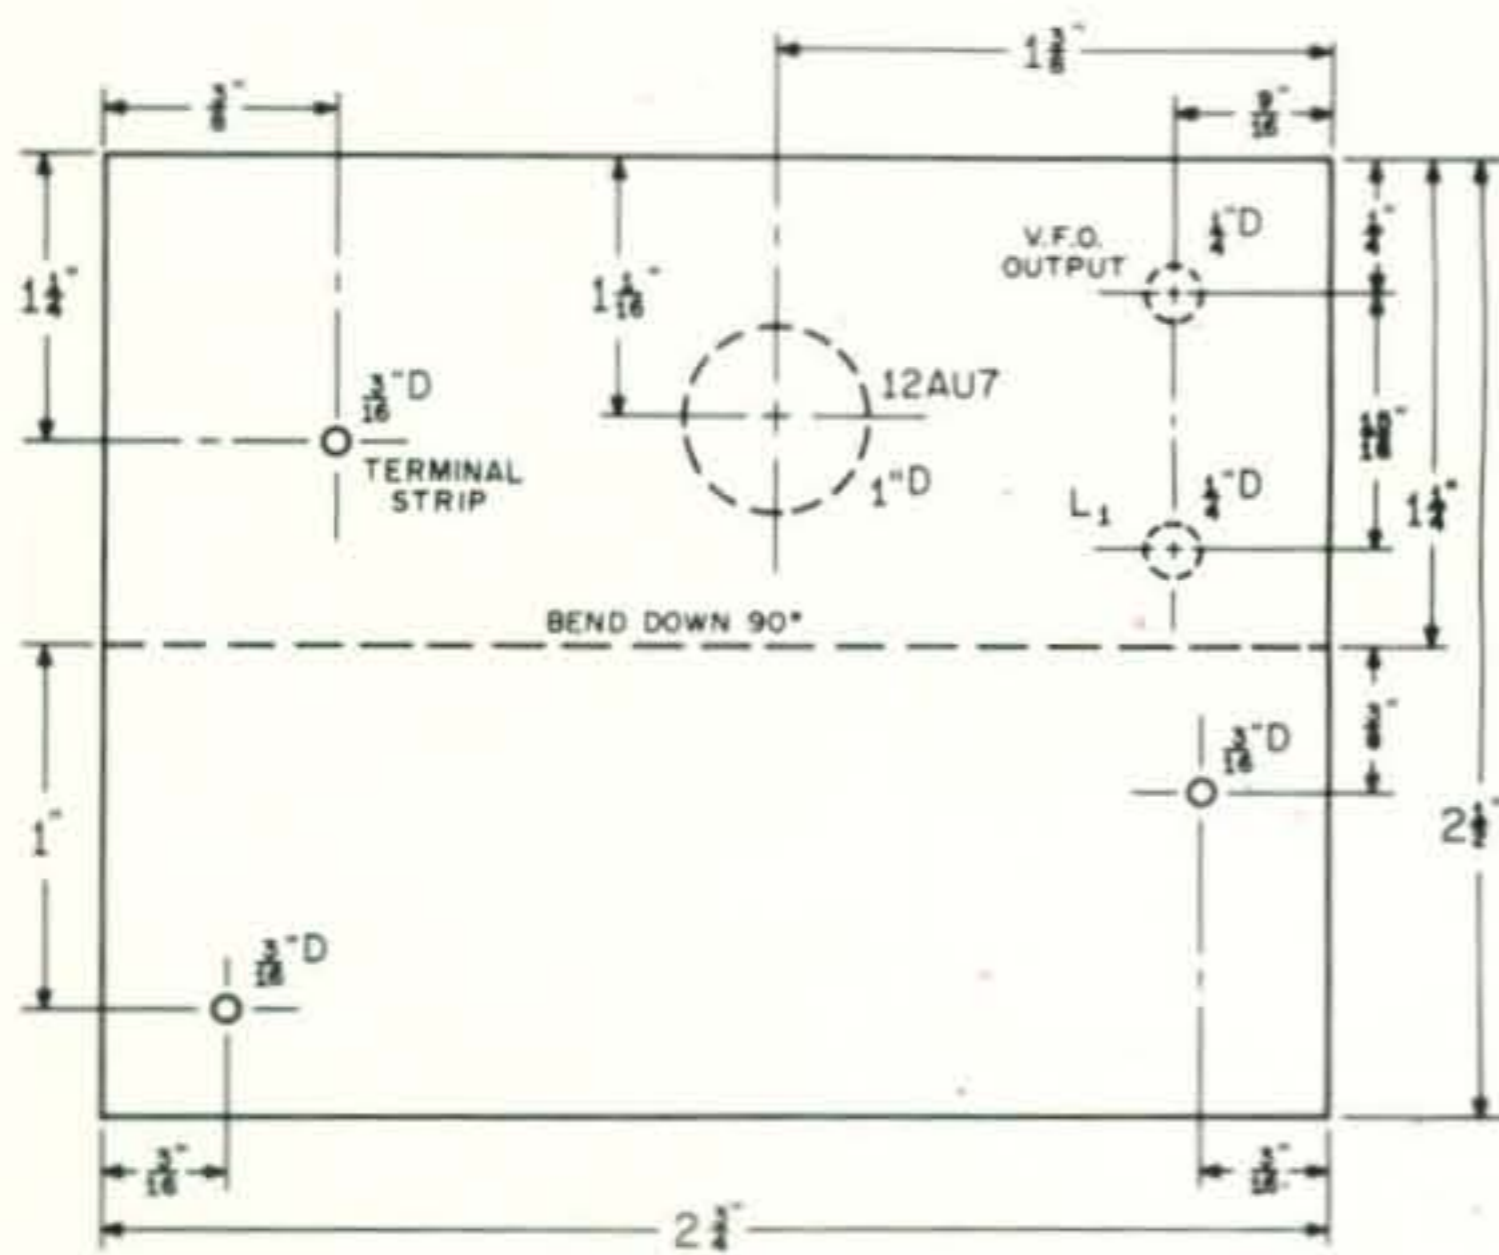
Chassis dimensions for the transmitter v.f.o. line driver mounted on the rear of the v.f.o. assembly in the 32S-1
